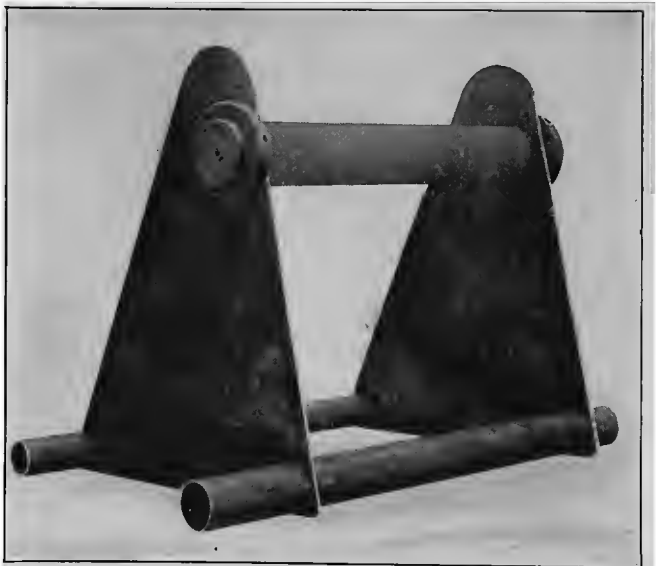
JIG USED FOR BABBITTING HAY-BALING FRAMES proceeding simultaneously with the building of the first machine.
